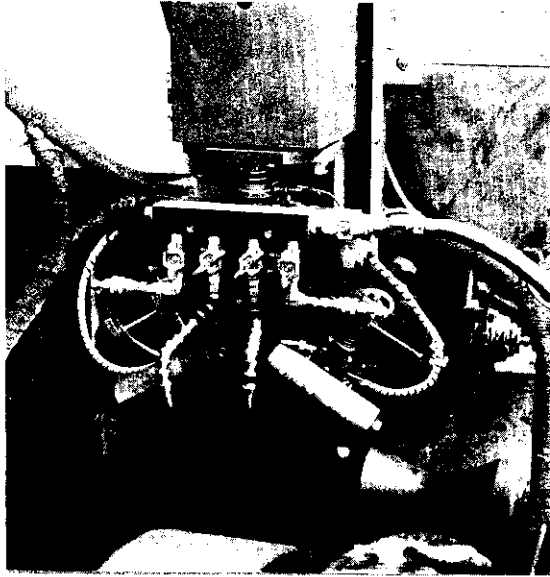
Appearance of multiprobe type weld flaw monitor
